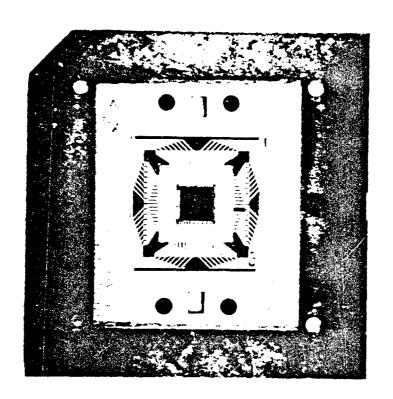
Photograph of ILB sample assembled into slide carrier.
